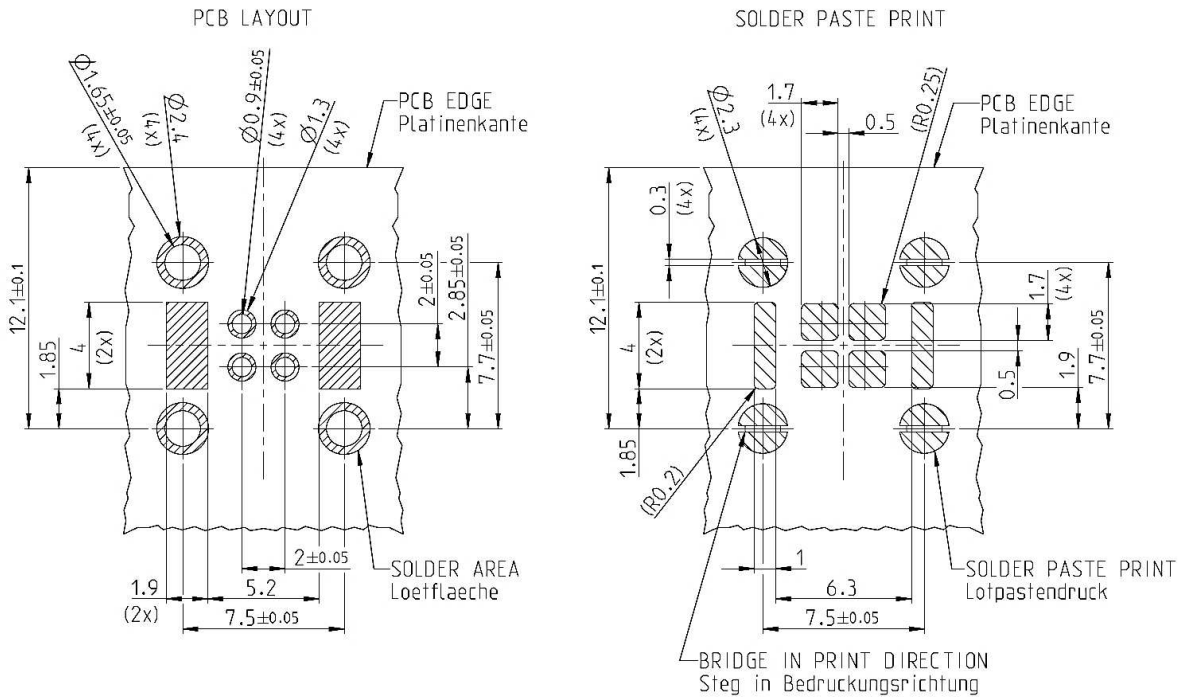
/ Bild 7: Layout for HSD Header 90° with shielding TE-No. 2286797
